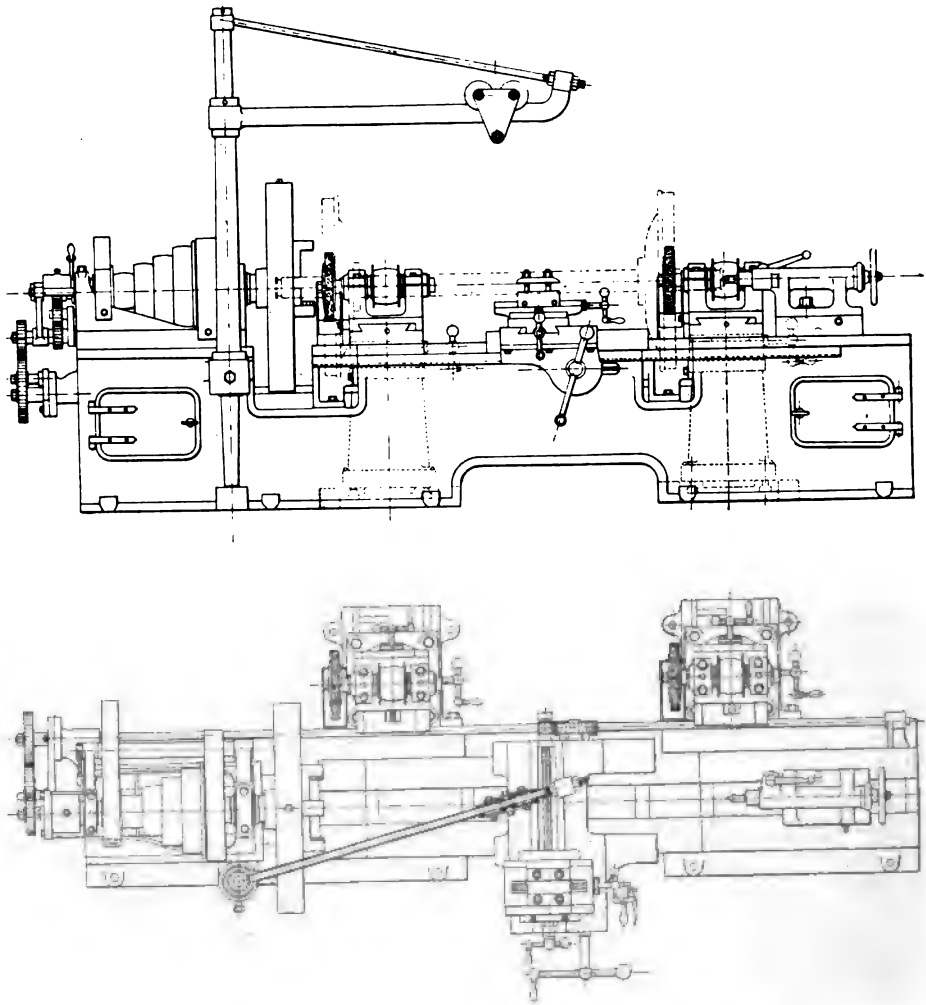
TRAMWAY WHEEL GRINDING MACHINE, ALSO ADAPTED FOR TURNING AND BOPING THE BOSSES OF WHEELS, MADE BY MESSRS. POLLOCK, MACNAB & CO., LTD., MANCHESTER
